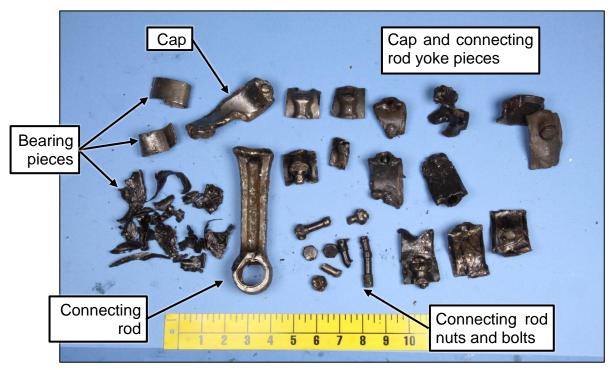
Connecting rod assembly pieces from within the bag containing pieces of connecting rod assemblies, piston assemblies, and crankcase.
